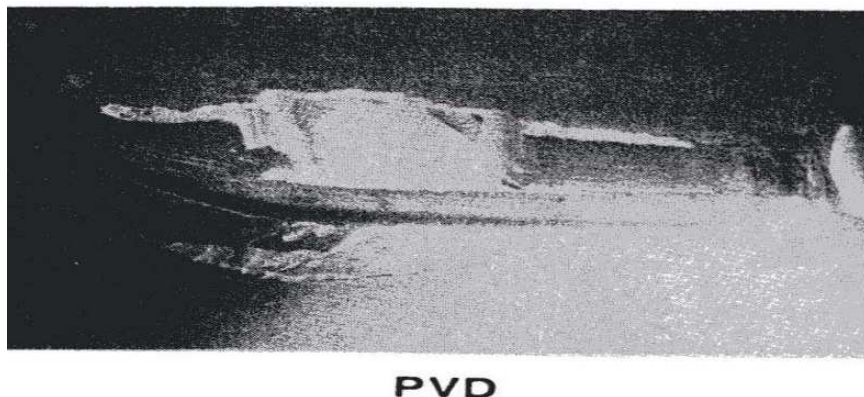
Appearance of an TiN PVD Coated Insert at the end of Tool Life After Machining 1045 AISI Steel [58]
